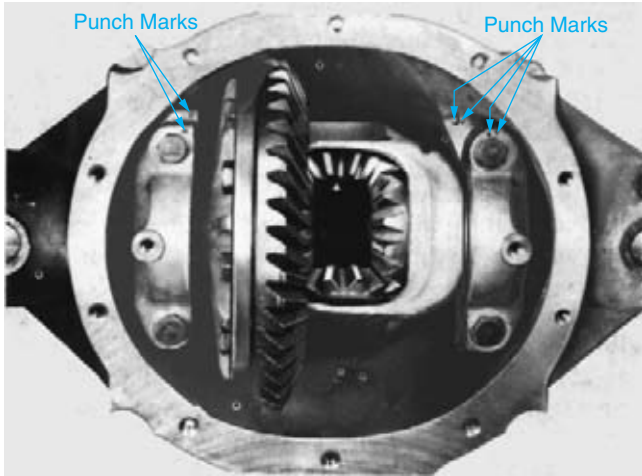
Index marks should be placed on the bearing caps before removal to ensure proper replacement. (Courtesy of DaimlerChrysler Corporation)
